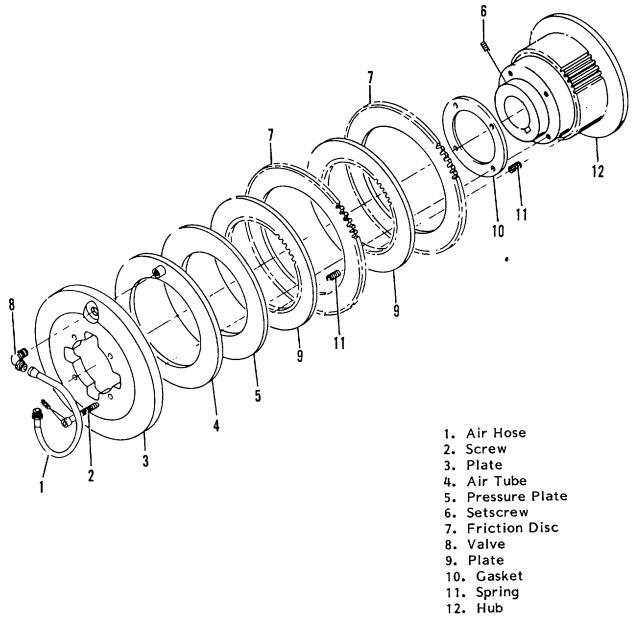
Hoisting and Auxiliary Drum Clutch
